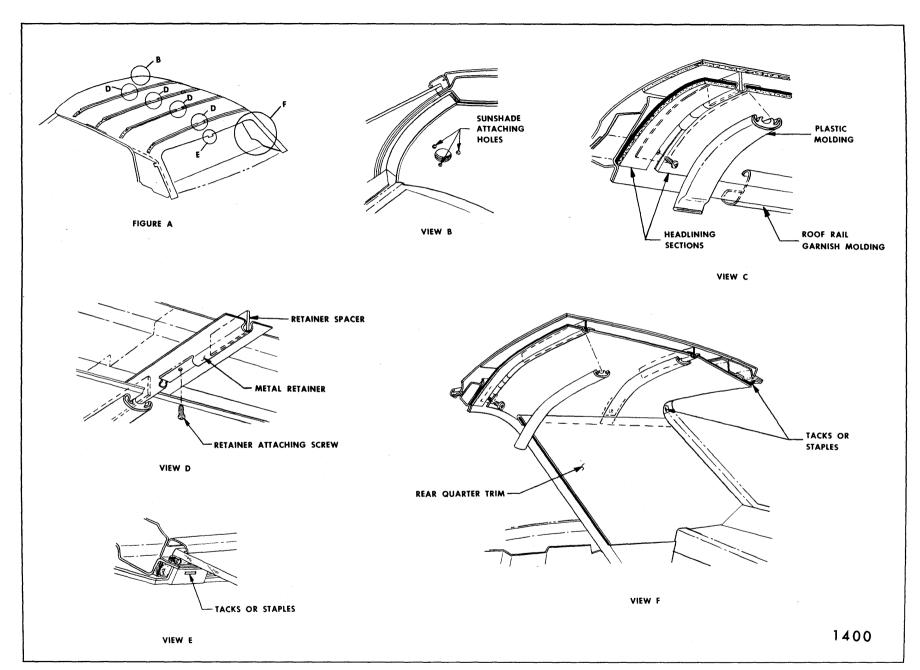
Polyurethane Foam Headlining and Flocked Headlining Installation
